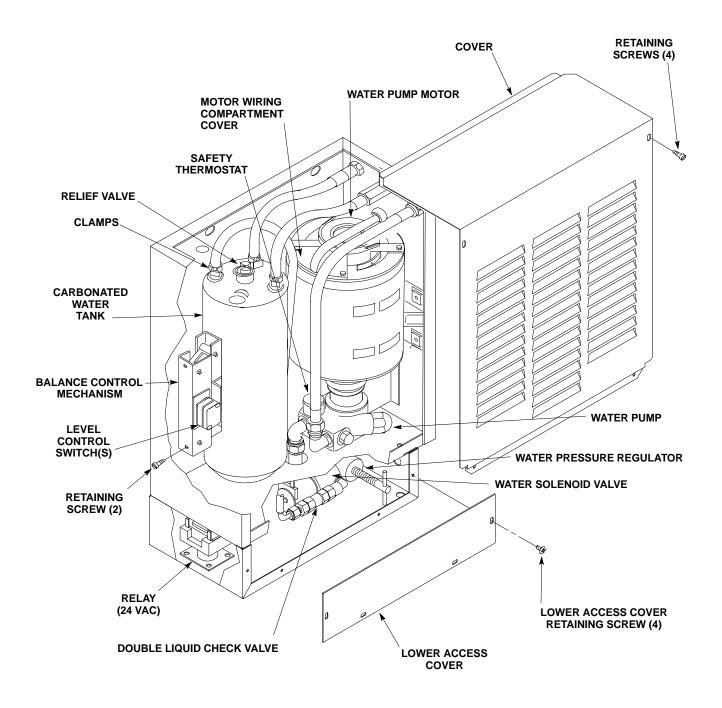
CARBONATOR ASSEMBLY COMPONENTS
